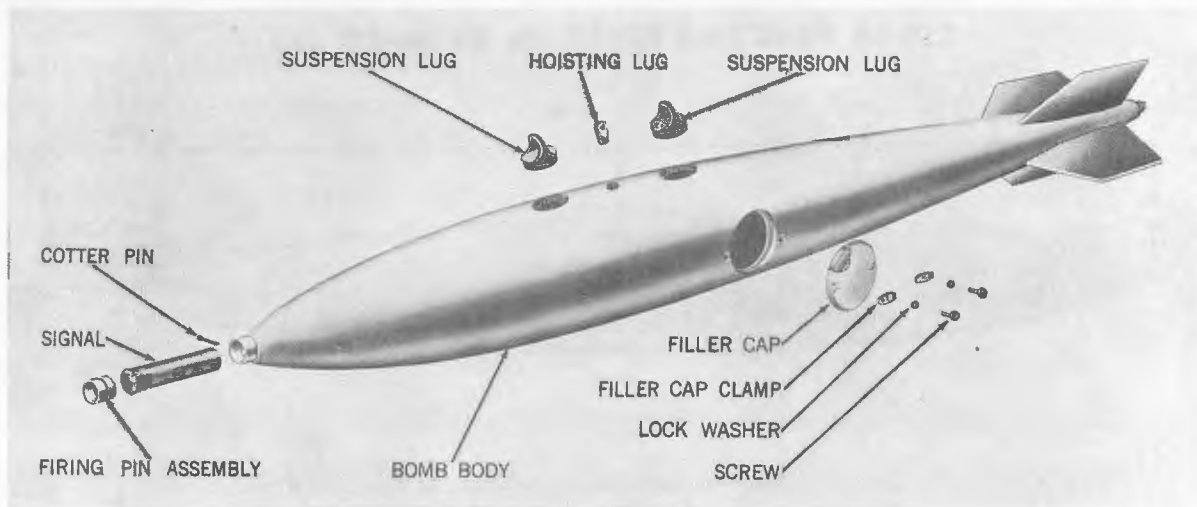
250-lb Practice Bomb Mk 86 Mod 0, Exploded View.
